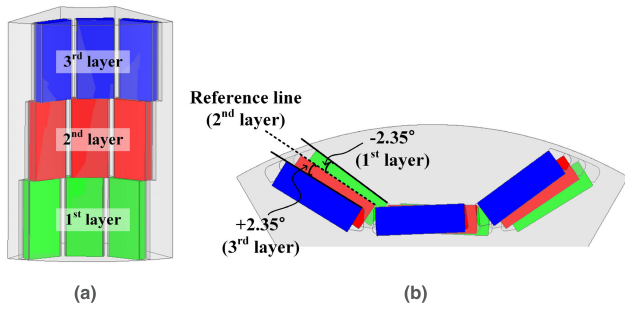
Three dimensional model of rotor with 3-layers step novel skew (a) front view (b) top view.
